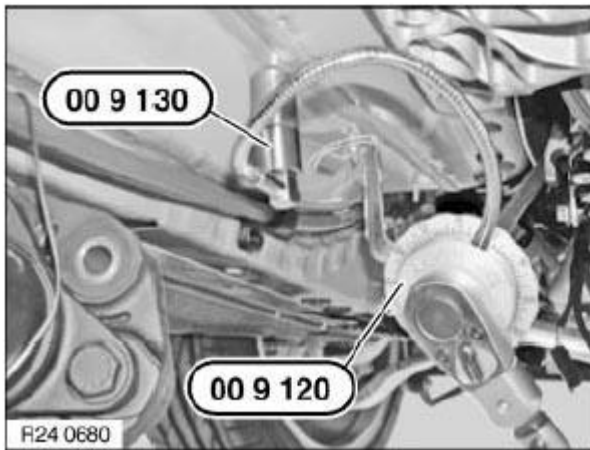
Identifying Special Tools (00 9 130 And 00 9 120)
